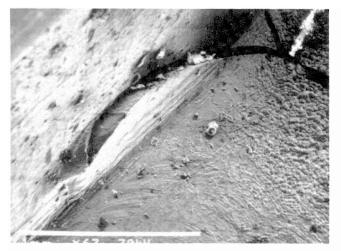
SEM Fractograph of the Dynamometer Wheel in Figure 33 Showing Cavitation Pitting Nucleation for Fatigue Failure of the Blading.
